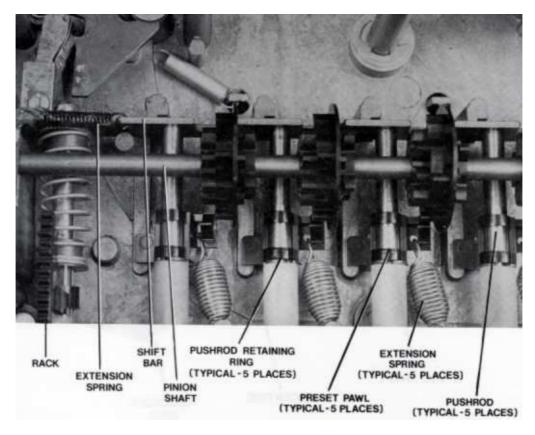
Meter Preset Parts Identification (Wheels Removed).
